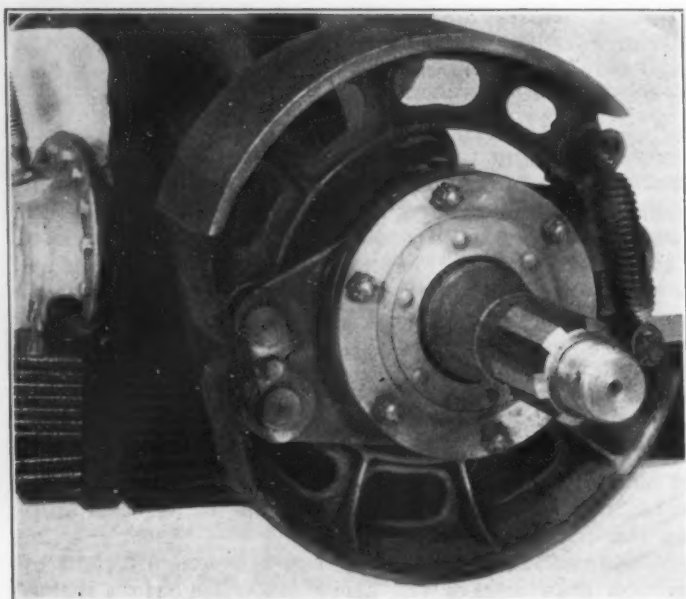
VIEW OF AIR-OPERATED REAR-WHEEL BRAKE-SHOE ASSEMBLY
